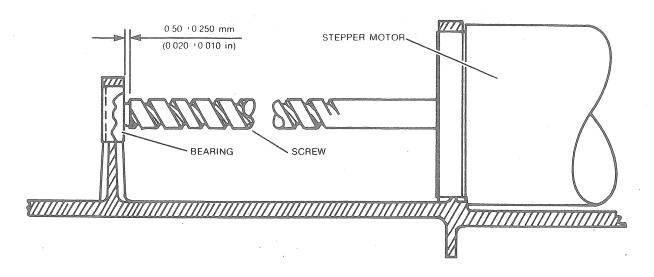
BEARING/SHOULDER CLEARANCE
